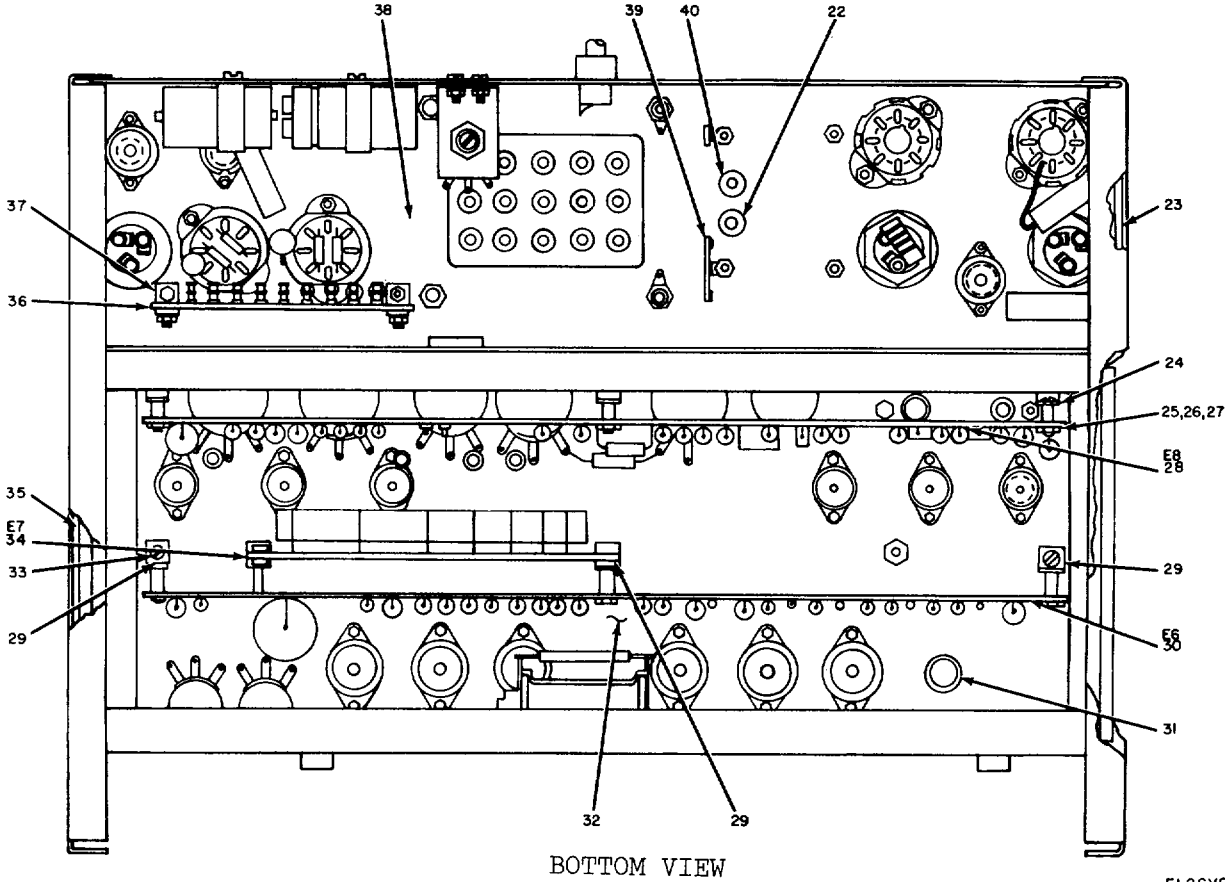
Generator, Signal SG-321B/U, Chassis Assembly (Sheet 2 of 2).
